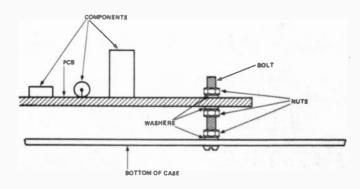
A method of fixing a PCB to a project case, using nuts, washers and bolts
